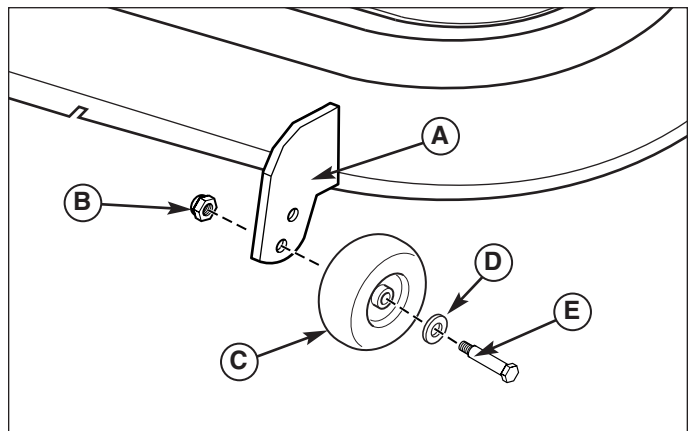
Fixed Bracket Gauge Wheel Adjustment
